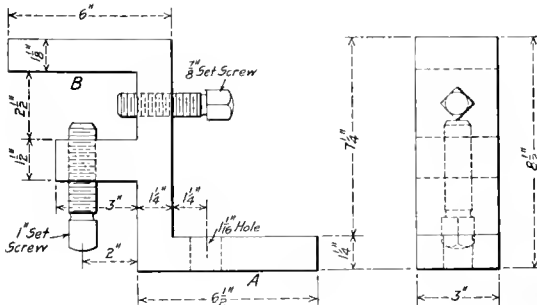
Details of Brackets for Holding Valve Chest Cover
